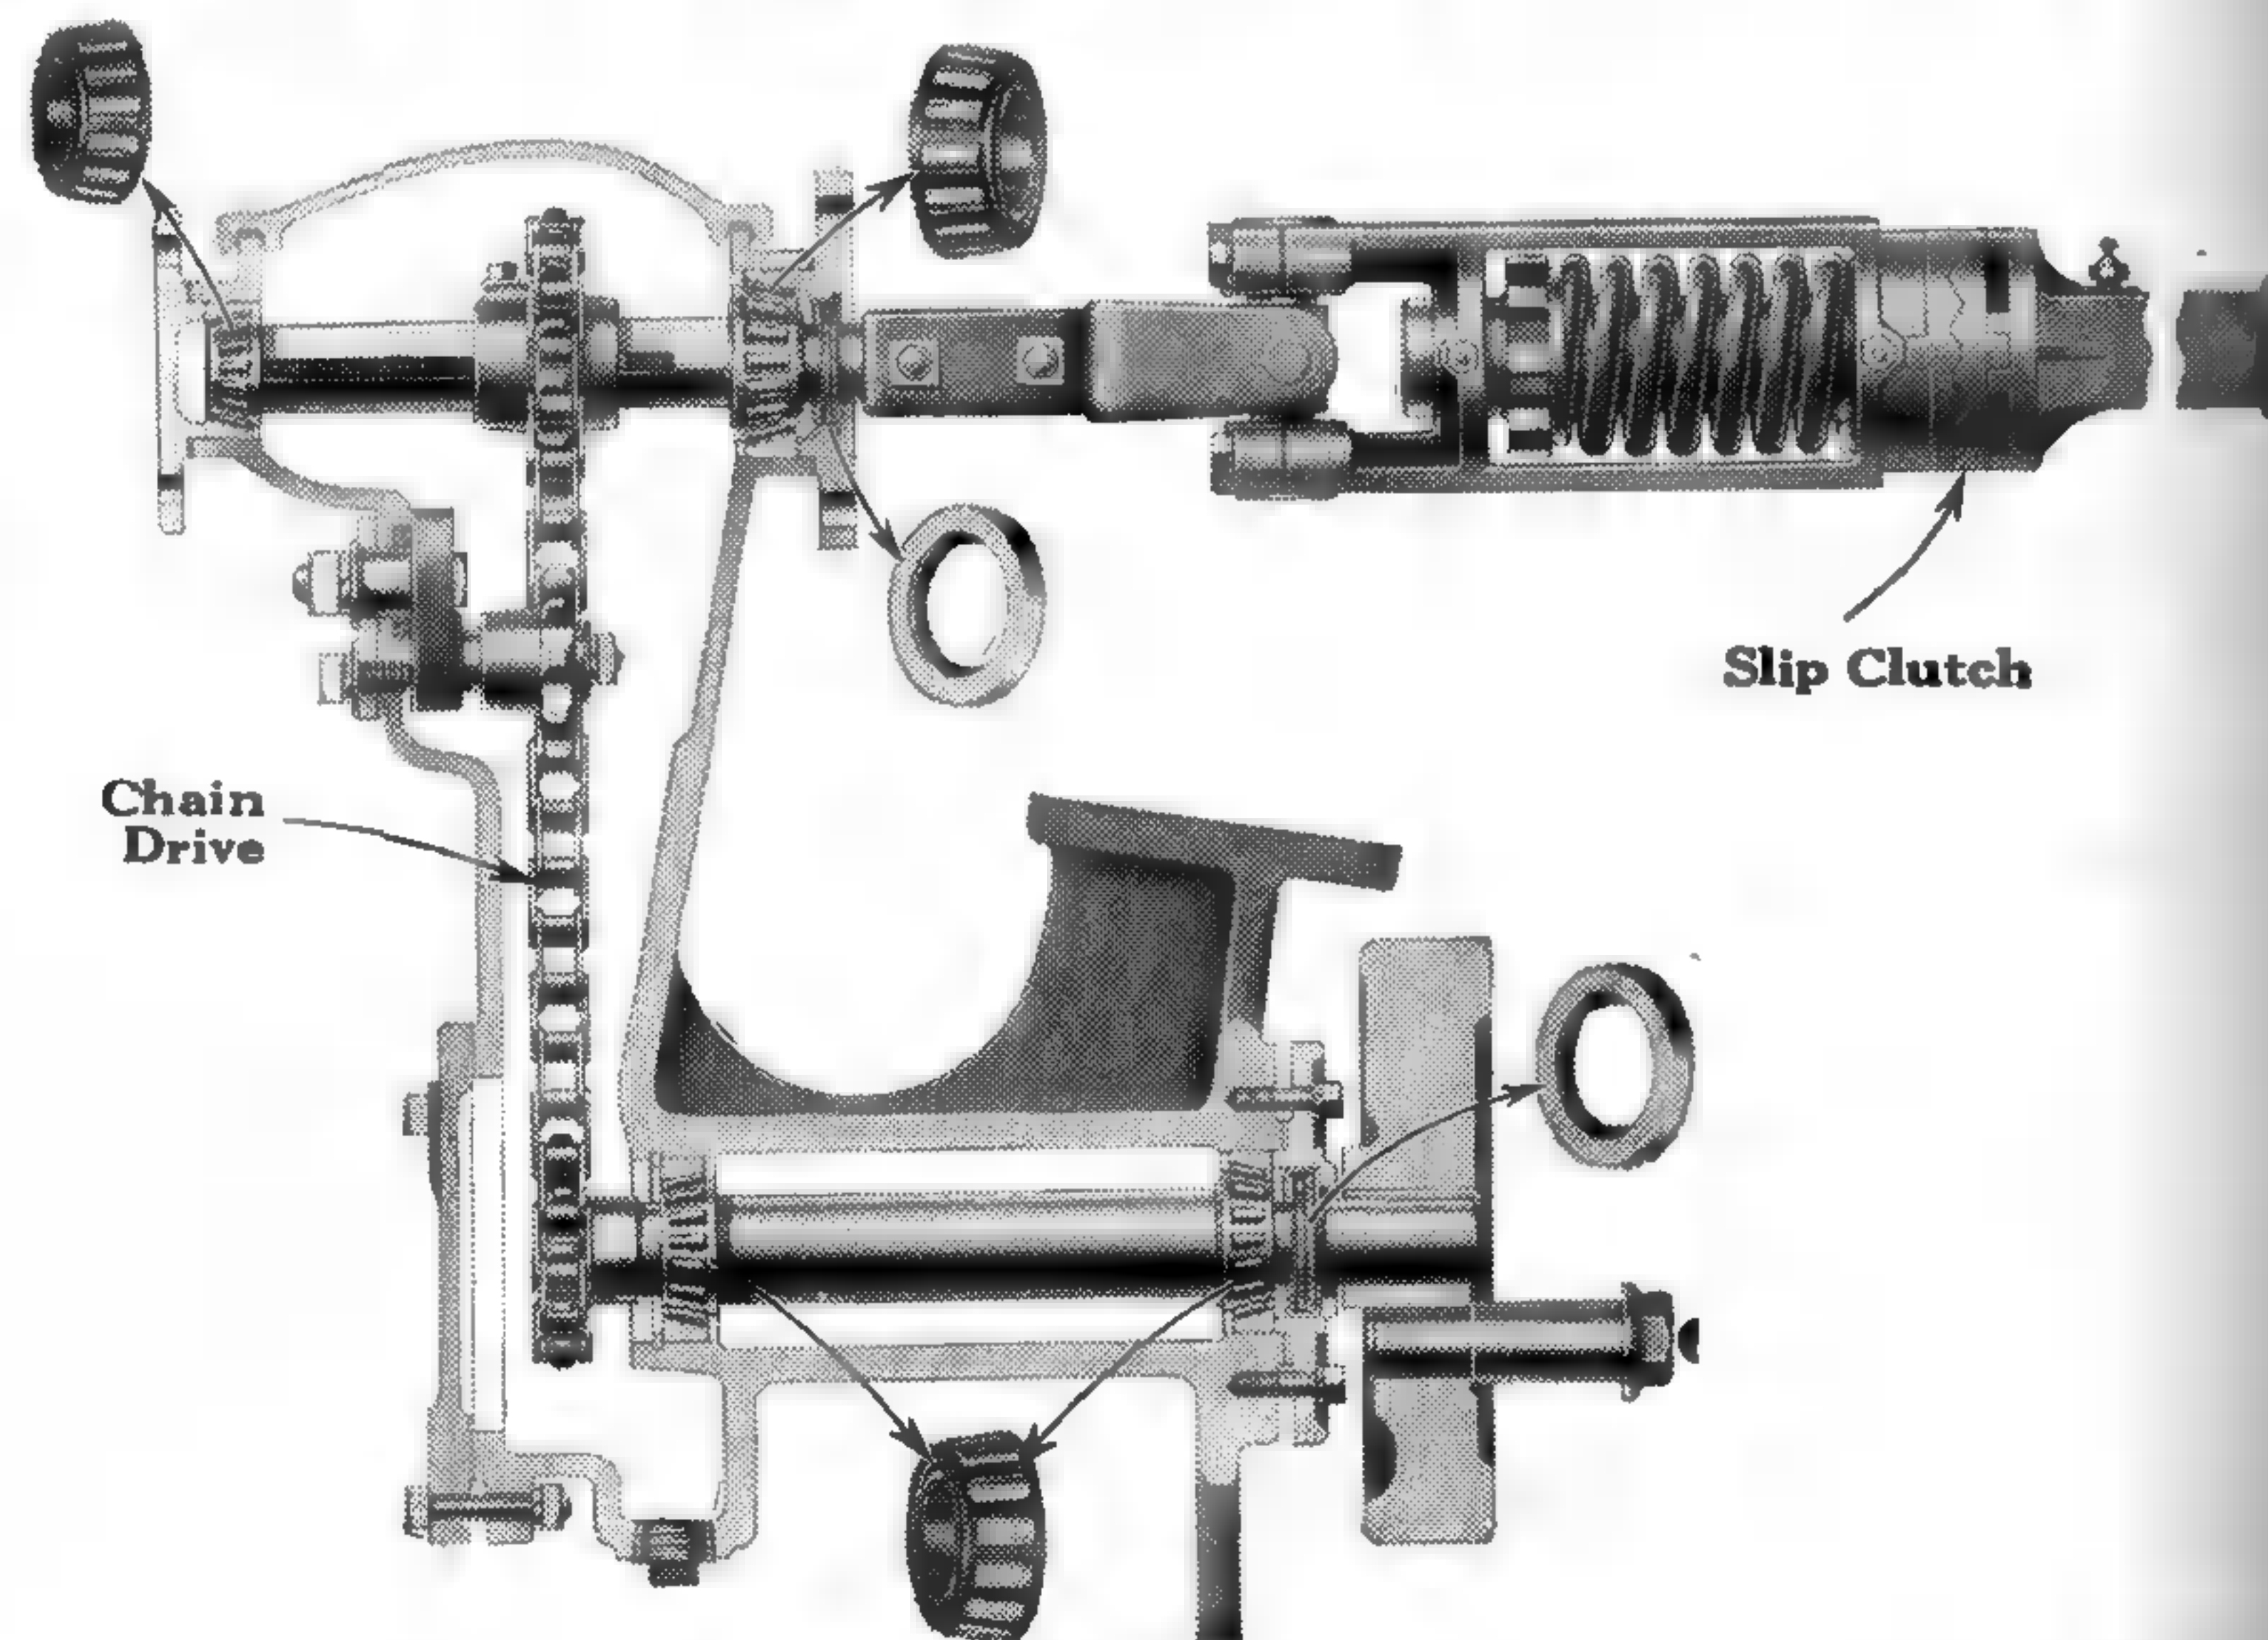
Cross-sectional view of the tractor mower showing the main drive, clutch, and bearings.
